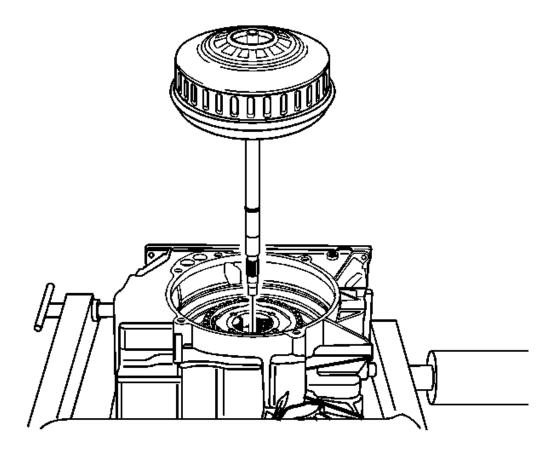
3-5 Reverse Clutch Piston Component View Courtesy of GENERAL MOTORS CORP.
